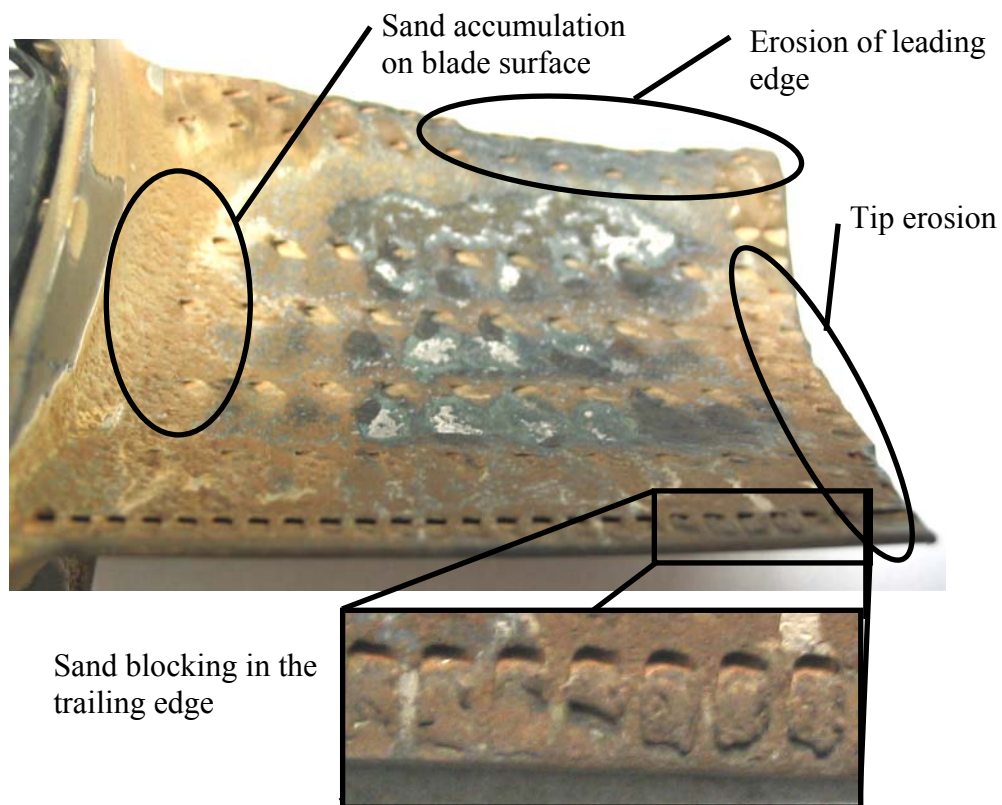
Sand ingestion can cause severe degradation of turbine blades by blocking film cooling holes (F-100-229).
